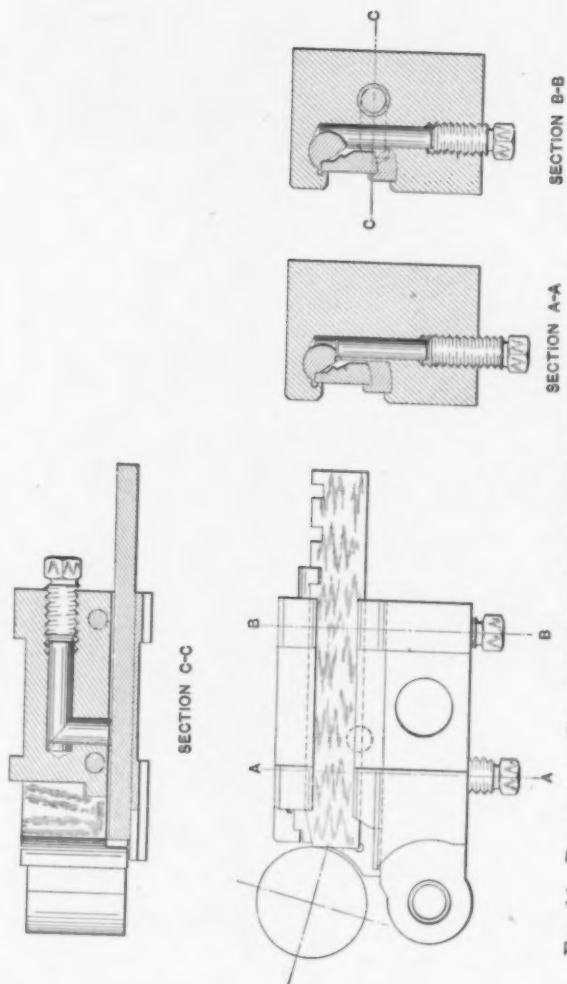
DETAILS OF TURNING TOOL SHOWING MEANS OF HOLDING CUTTER AND LIMITING THE OSCILLATION
